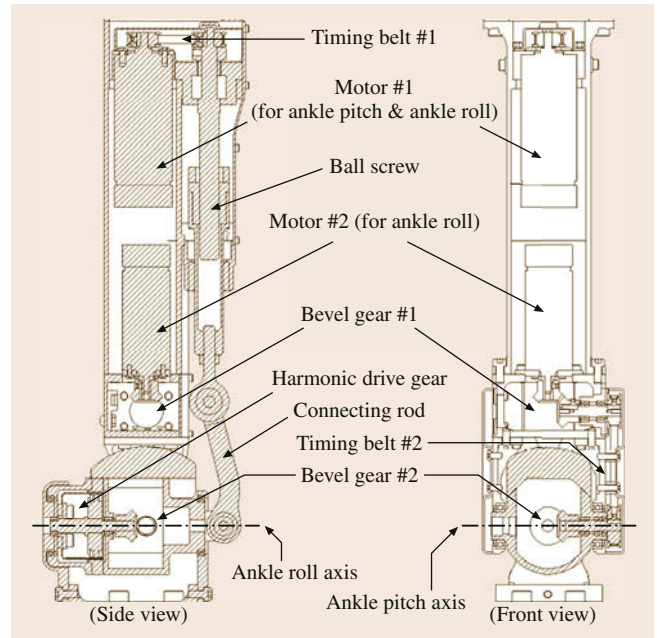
Ankle joint drive mechanism of HRP-4C
